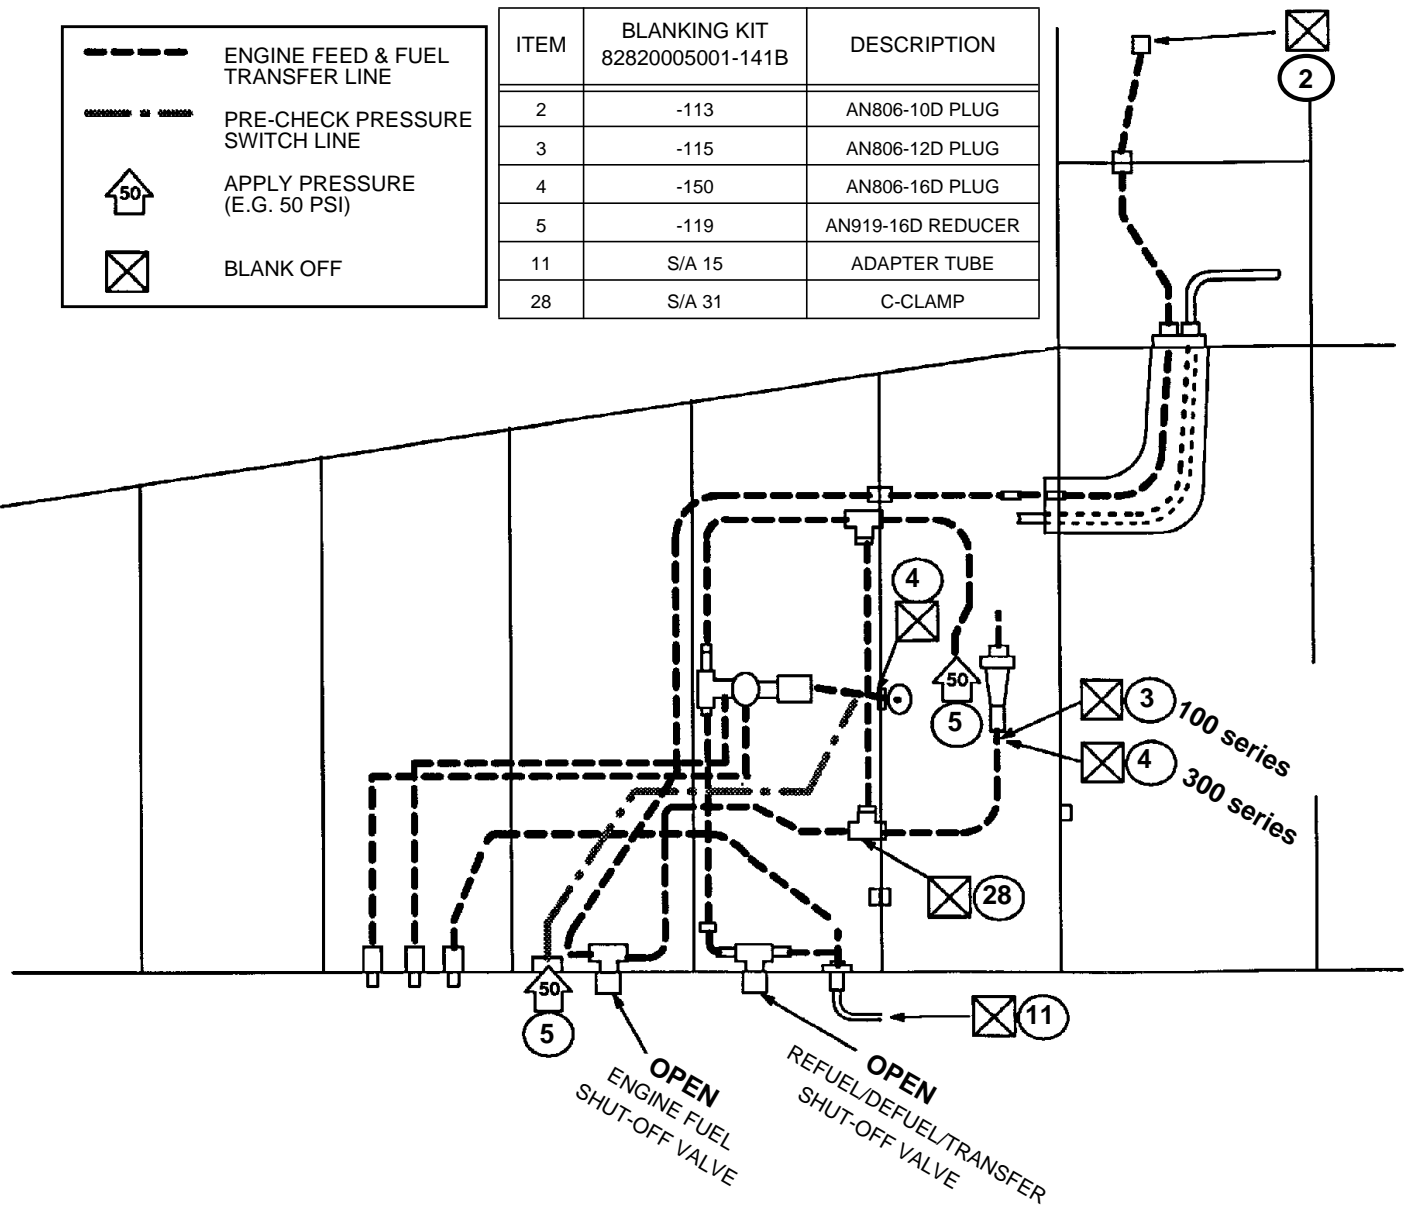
Engine Feed & Fuel Transfer Line and Pre-Check Pressure Switch Line
